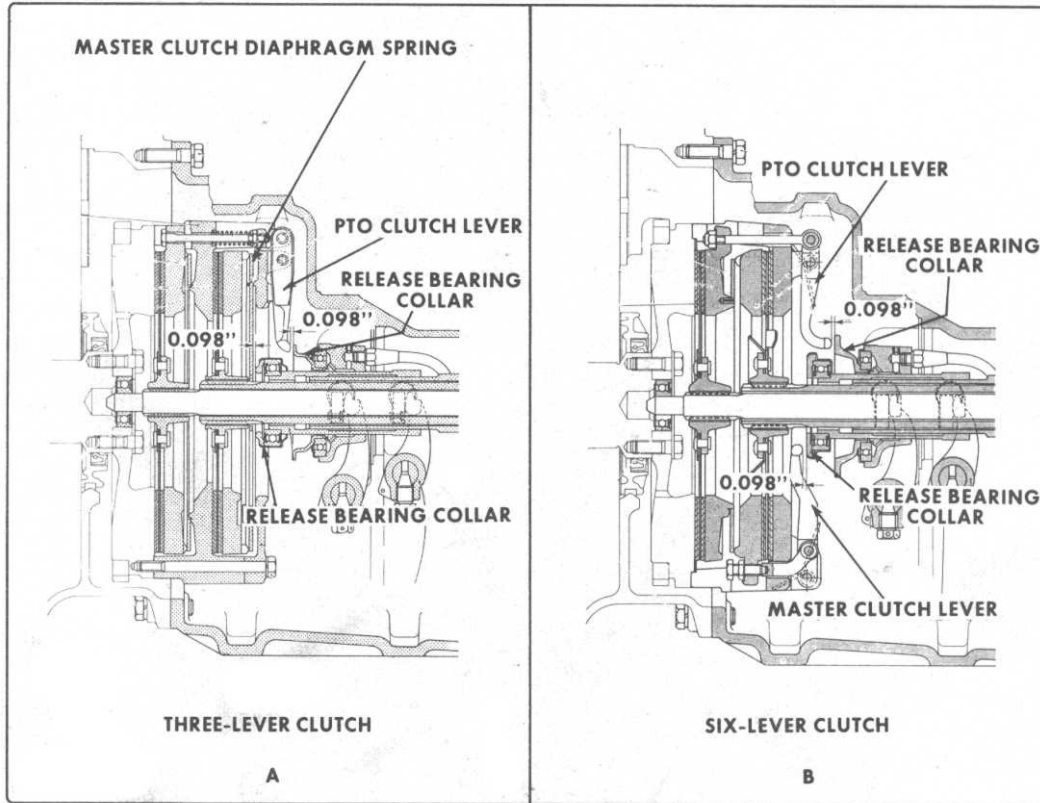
1355, 1365 and 1370 Clutch Release Bearing Collar Clearance
